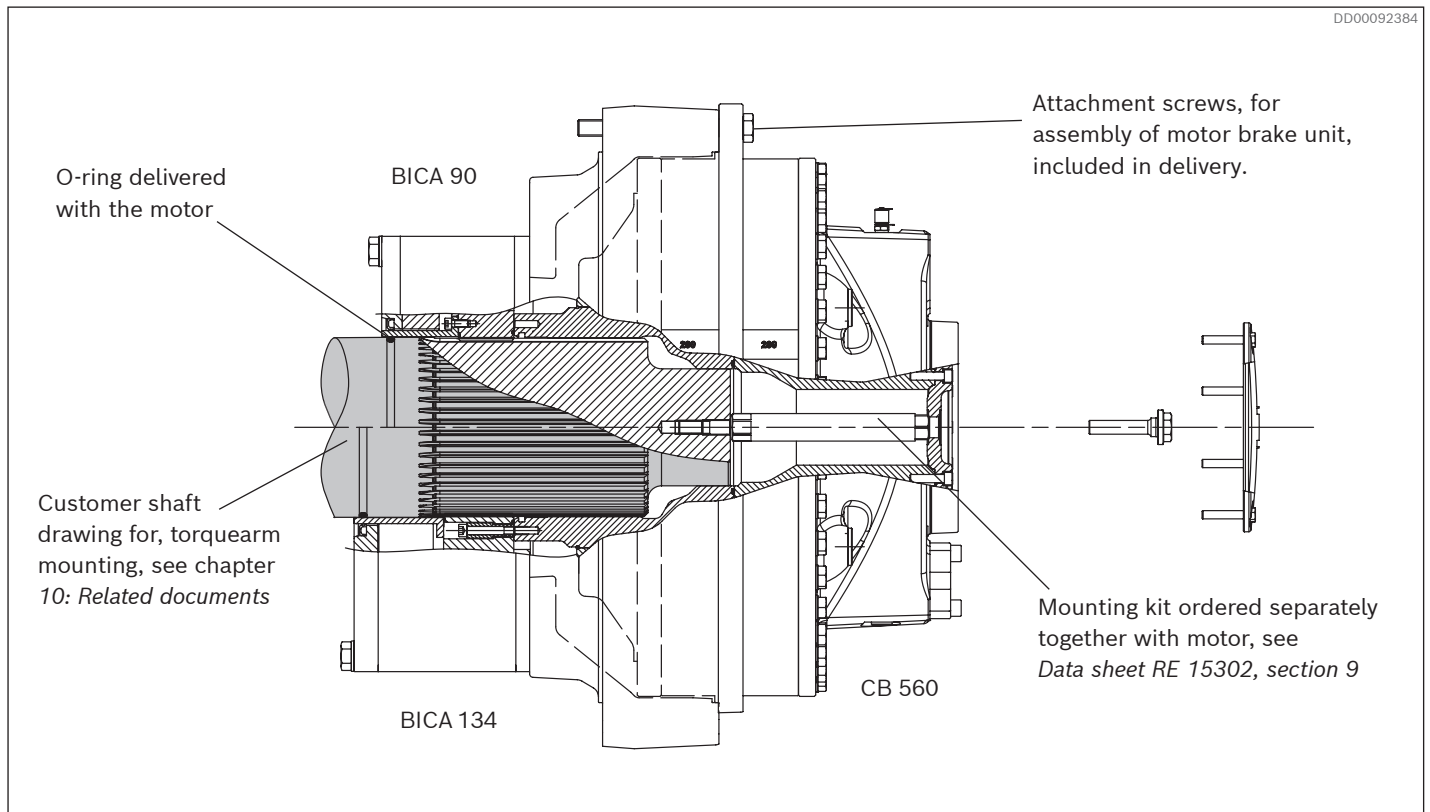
Example torque arm mounted CB motor with spline and BICA brake on customer shaft
